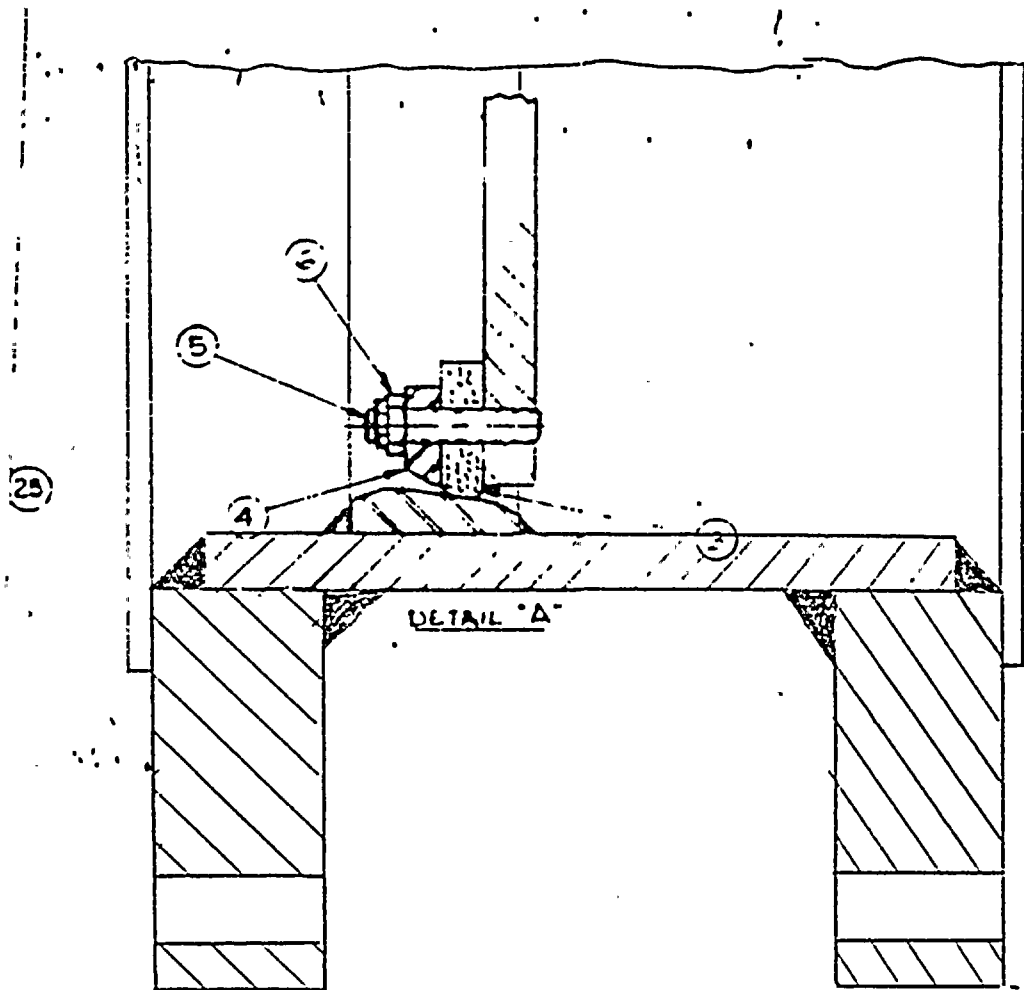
BIF DRAWING 206767, DETAIL A
